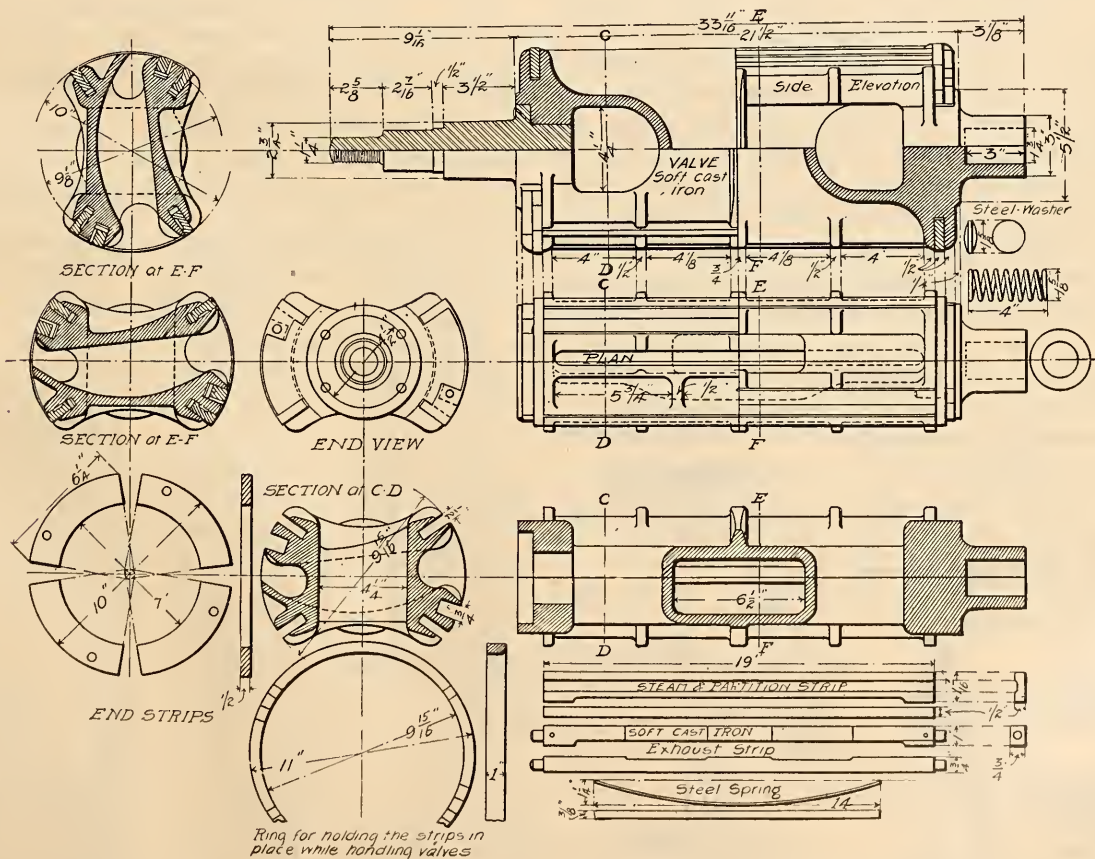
DETAILS OF VALVE AND PACKING STRIPS—YOUNG ROTARY VALVE GEAR FOR LOCOMOTIVES.
